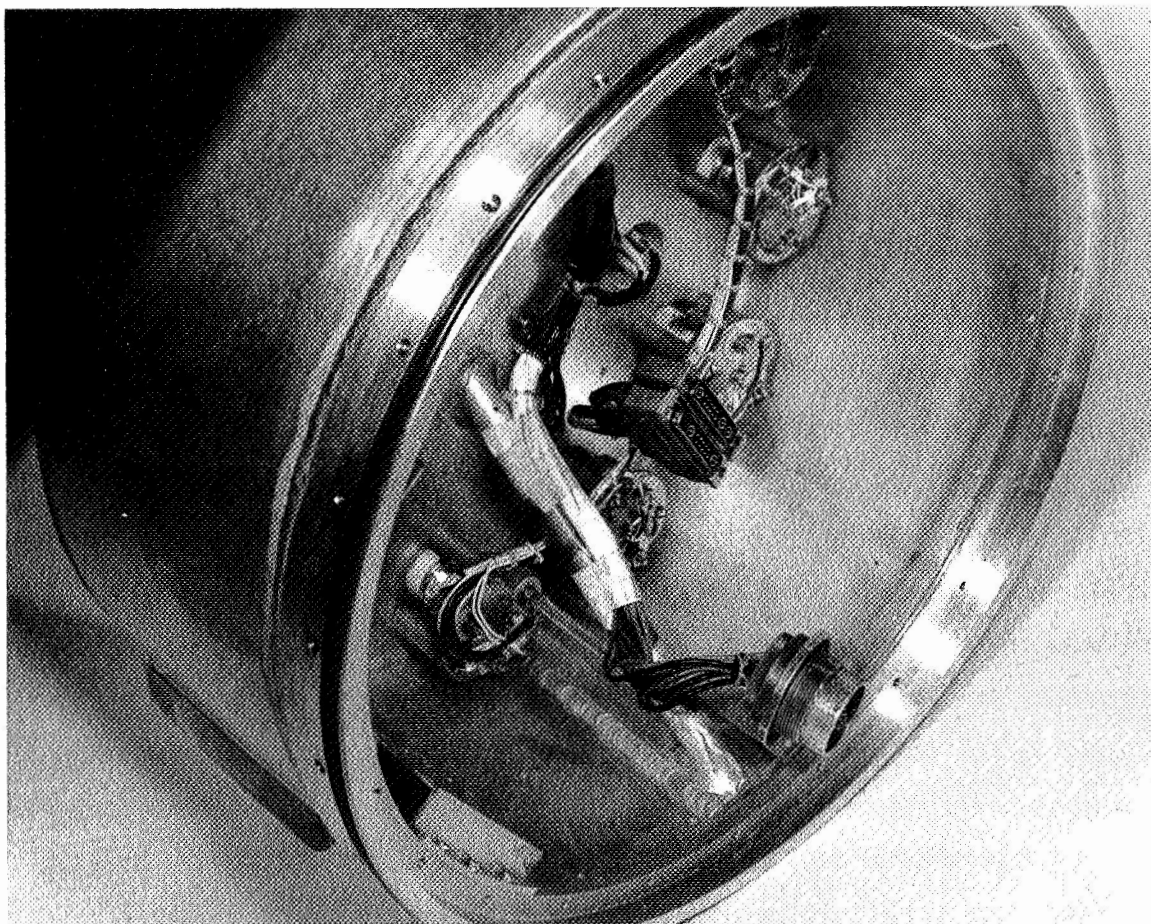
Gun Mounts and Cabling - Pressurized Side.
